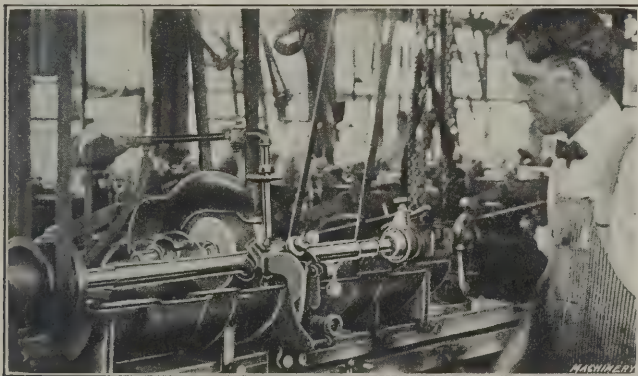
Finishing Steel Shafts in a Brown & Sharpe Universal Grinder
